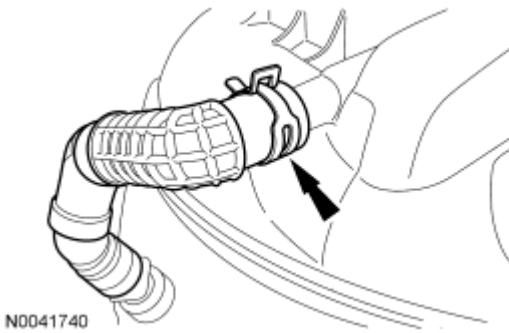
Locating Crankcase Vent Hose From Upper Intake Manifold
